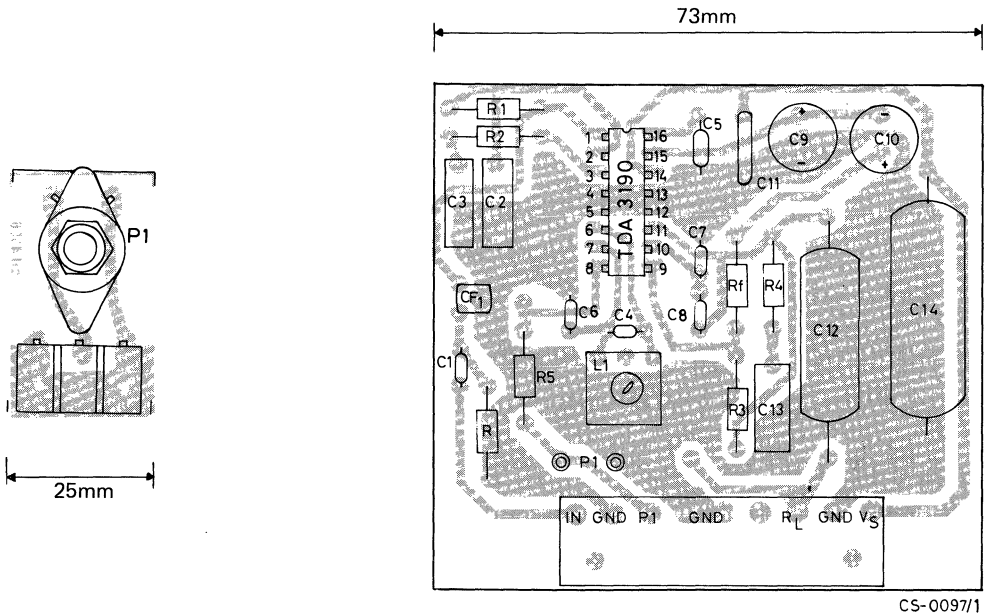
P.C. board and component layout of the circuit shown in Fig. 16 (1:1 scale)
